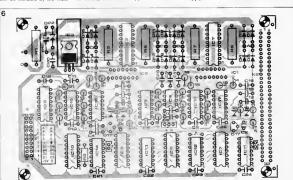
Track Jayou) and component mounting plan for the motor control board. 2-36 mater made february 1987.
